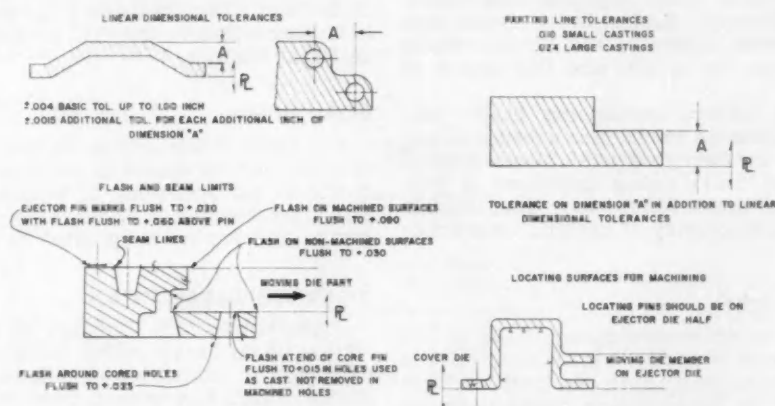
Recommended dimensional tolerances and casting cleaning limitations for die casting.
